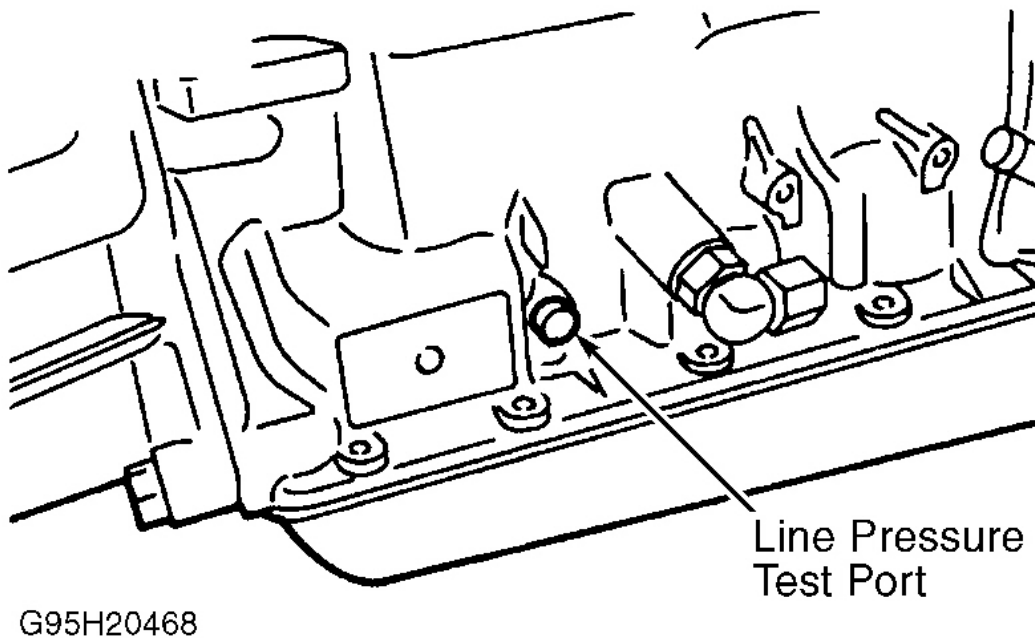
Identifying Transmission Hydraulic Pressure Test Port
